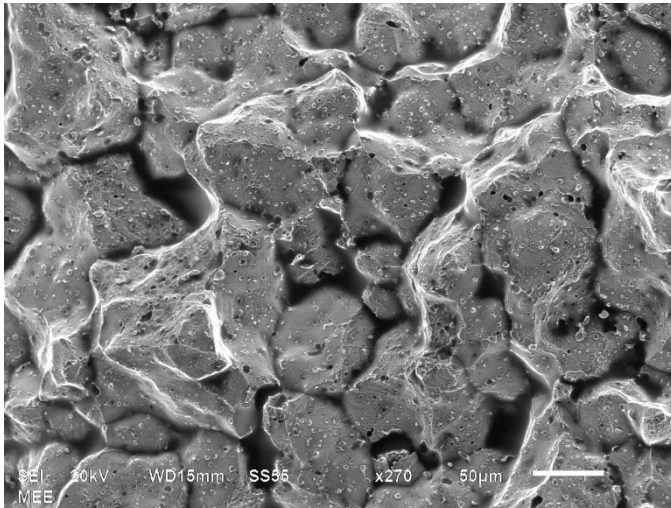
270X Fracture Surface Fitting 2
